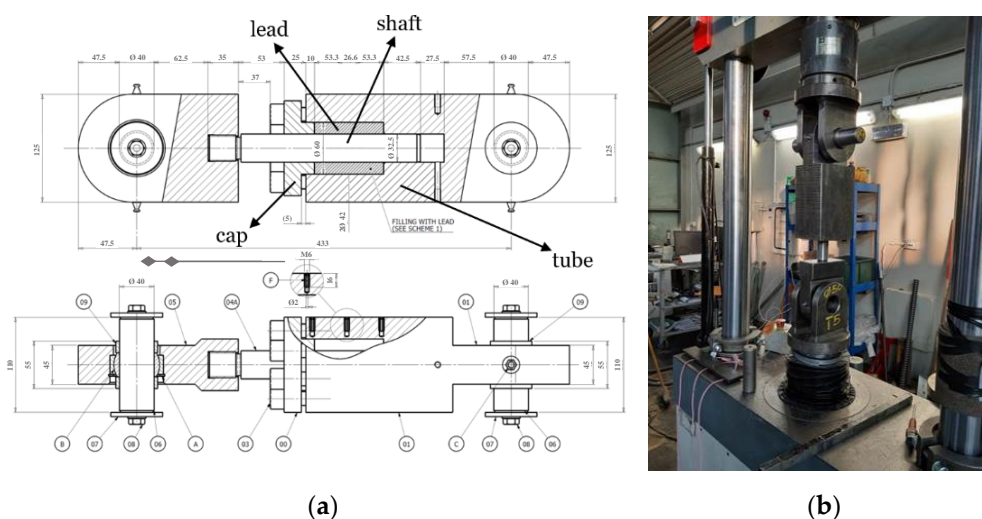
PS-LED experimentally assessed in the study: (a) shop drawing; (b) prototype on the testing machine [41].
